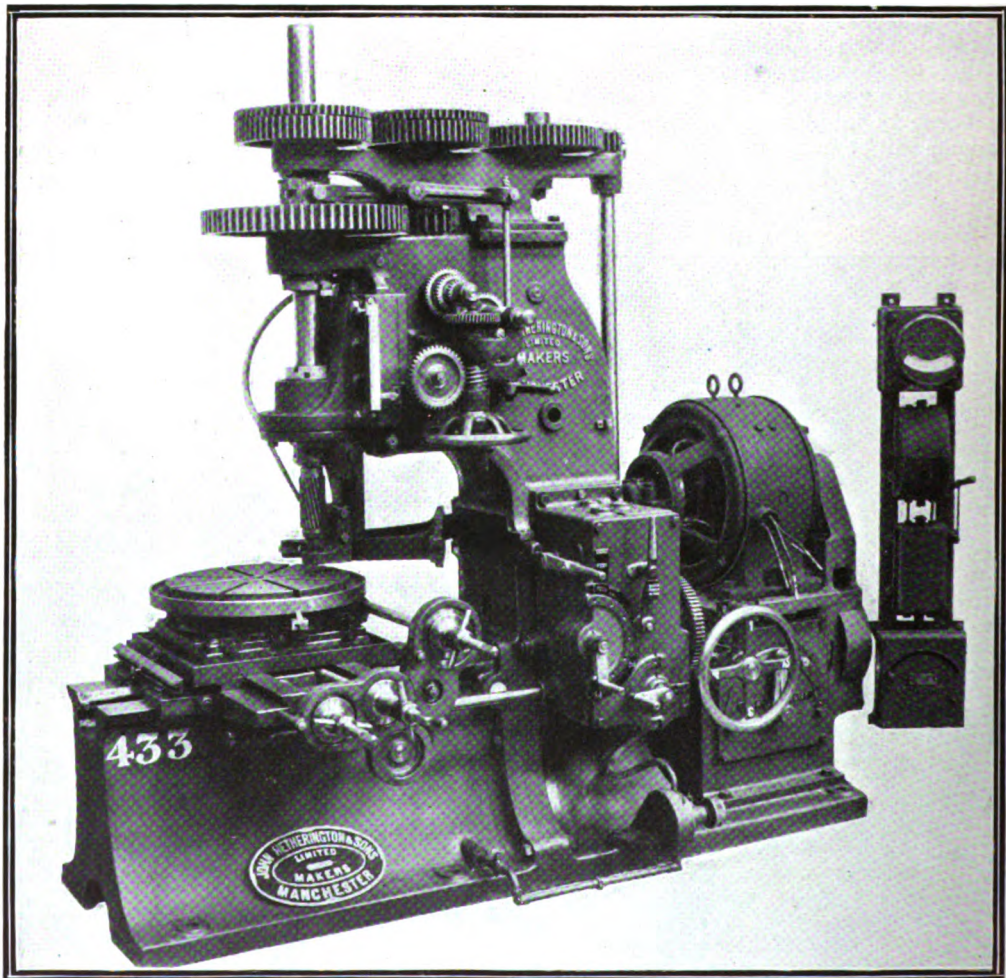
HETHERINGTON HIGH-SPEED VERTICAL MILLING MACHINE.
